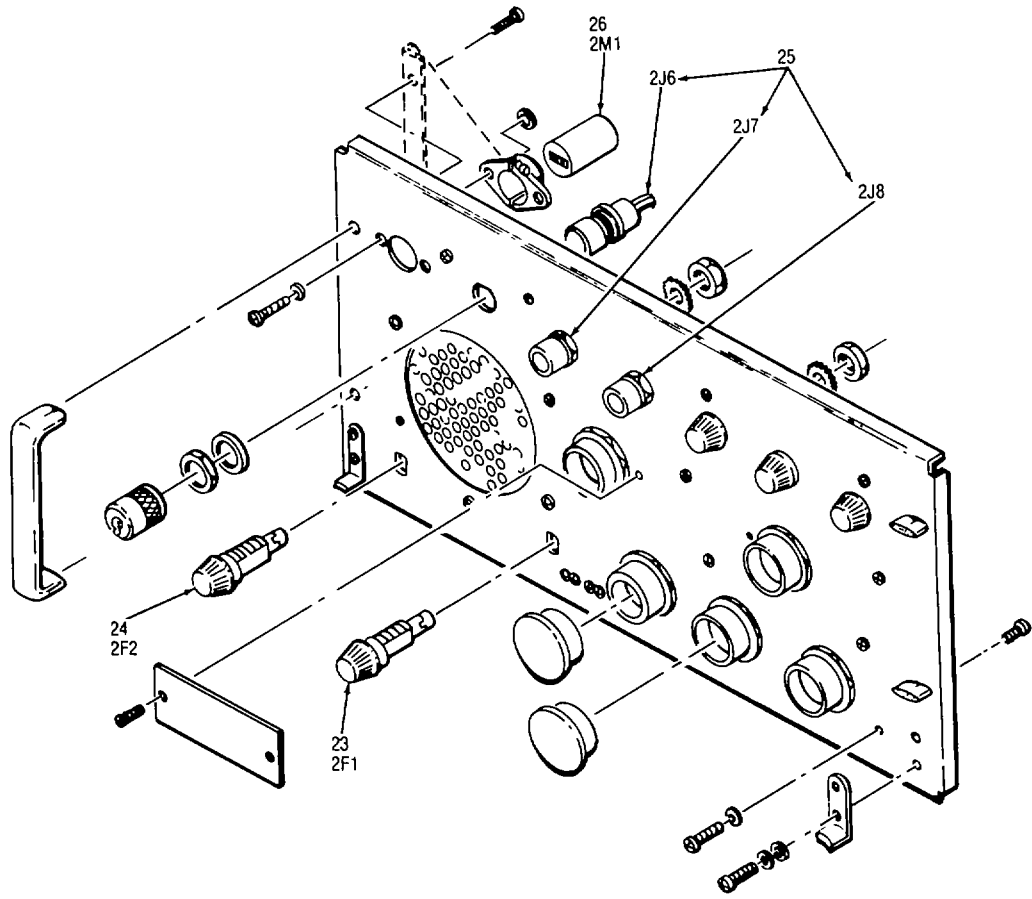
Encoder exploded view (sheet 5 of 8).
